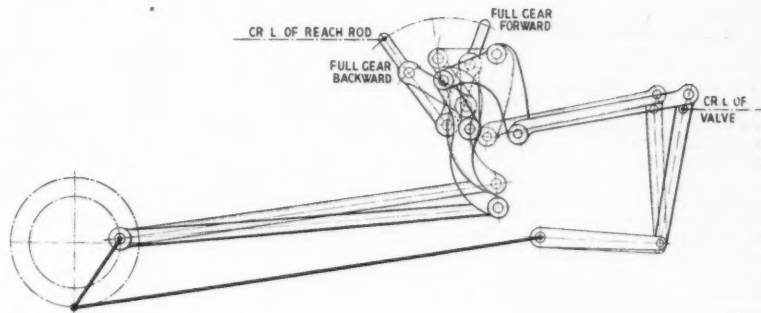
The same comparison is made as in Fig. 1 but with the engine crank on top centre. Note that as the engine crank approaches front or back dead centre the movement of the valve gear parts by the reversing gear becomes less, until the crank is actually on either dead centre; then the reverse may be moved without imparting any movement to the valve gear
